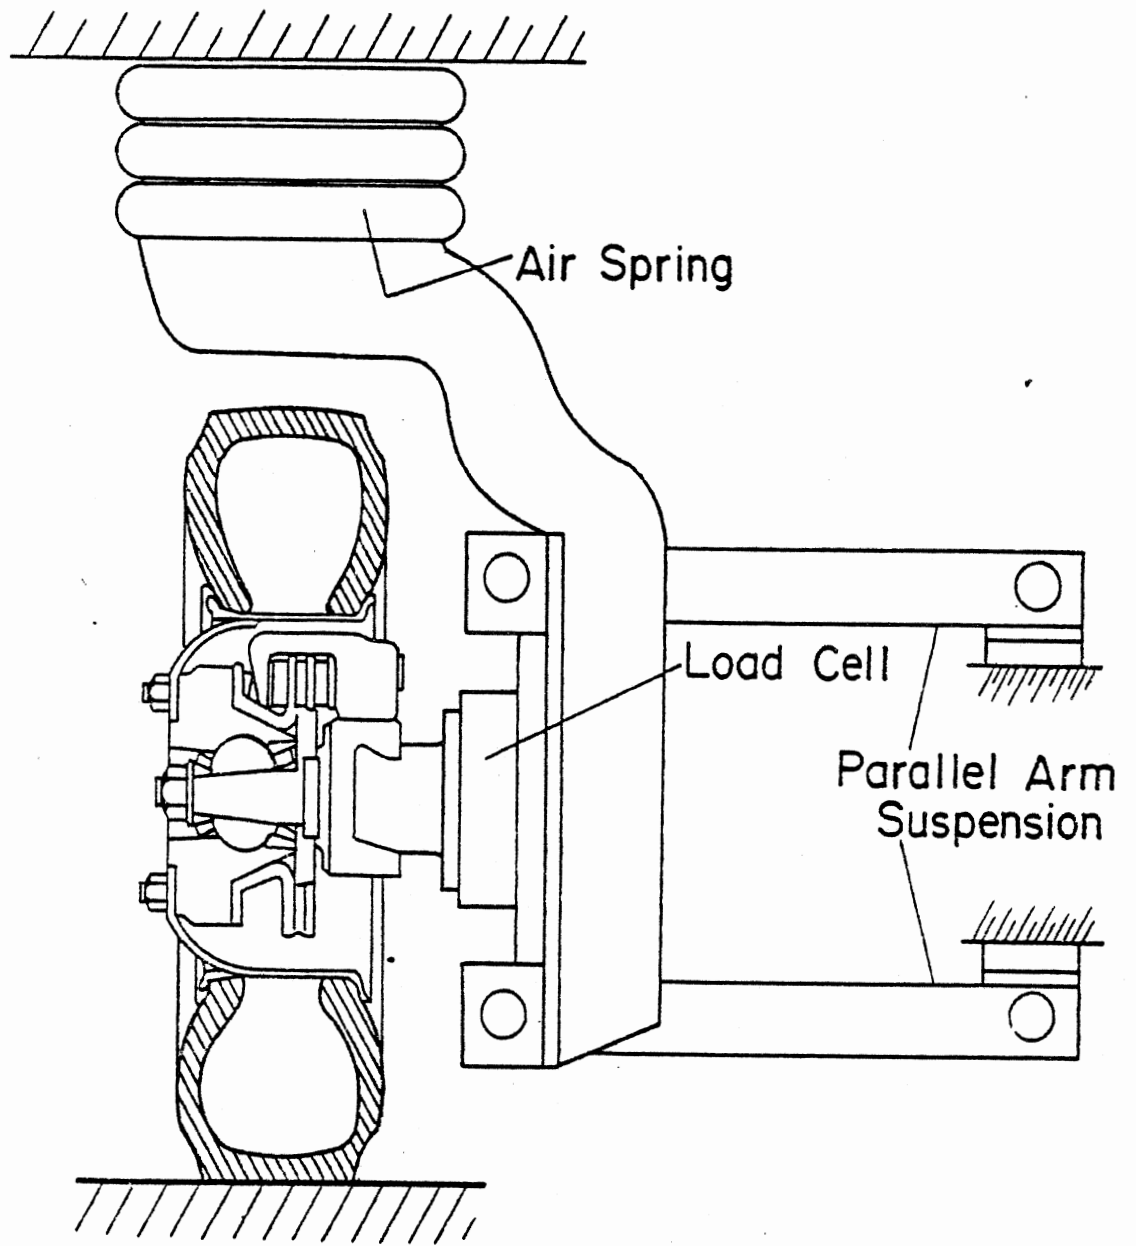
Test wheel suspension layout in the longitudinal traction measurement assembly.
